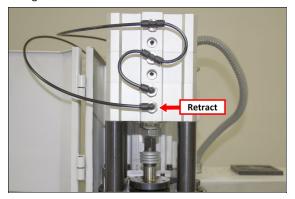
Retract fitting on the Power Drawbar cylinder.
